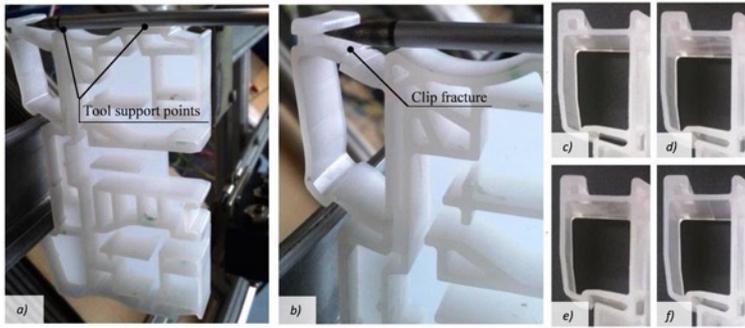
Samples made for assembly tests: a) disassembly process of the housing from the rail, b) the phenomenon of cracking of the flexible clip during the disassembly of the housing, c) view of the clip made by using the conventional method, d) view of the clip made by using the induction heating, $T = 130^{\circ}\text{C}$, e) $T = 150^{\circ}\text{C}$, f) $T = 170^{\circ}\text{C}$
